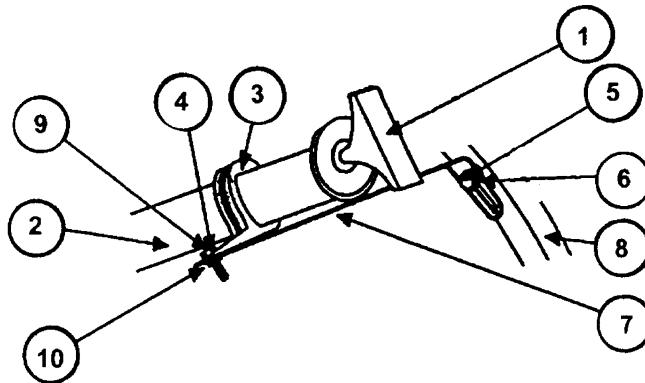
Oil Fill Tube Assembly and Oil Level Indicator (Dipstick).
